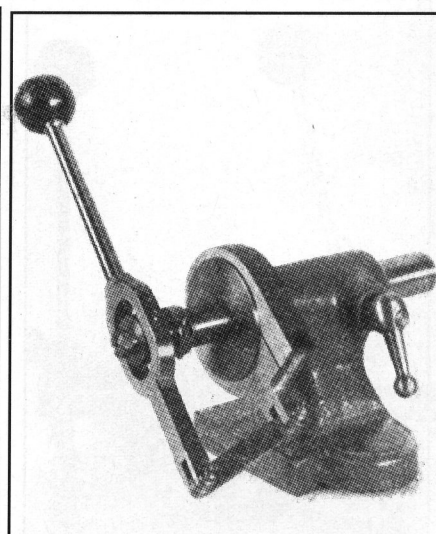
The complete attachment for converting the tailstock to lever feed.
